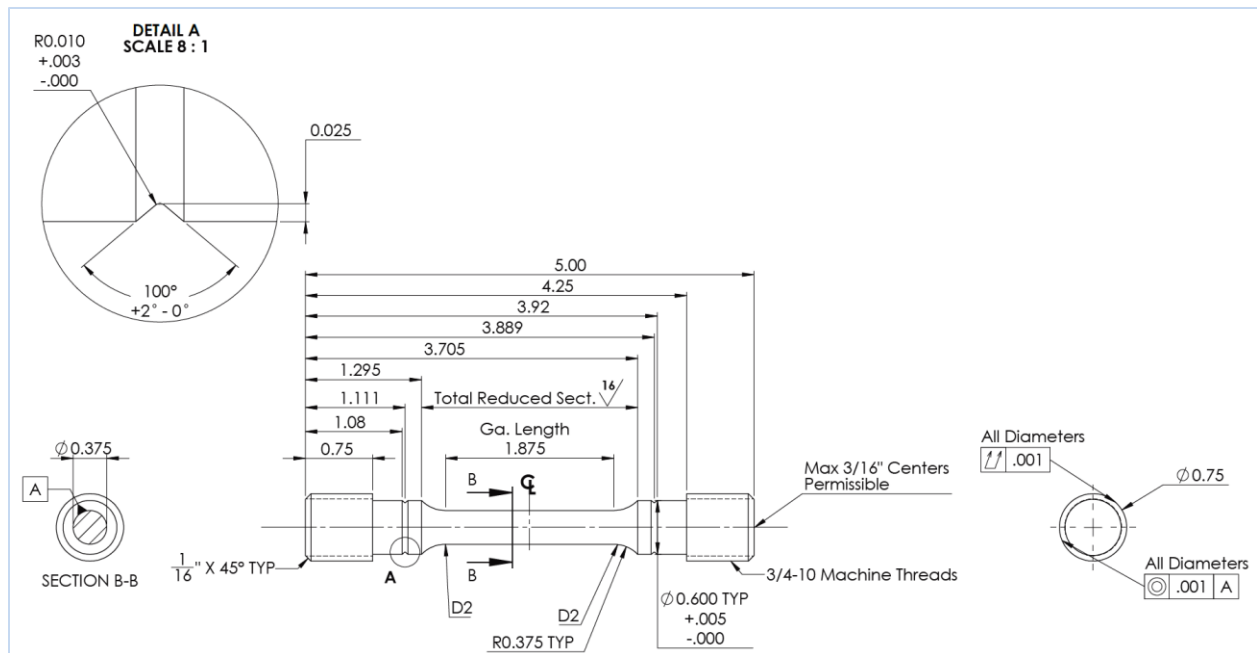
Creep specimen geometry for Alloy 709 Code Case testing at ORNL. Dimensions are in inches.
